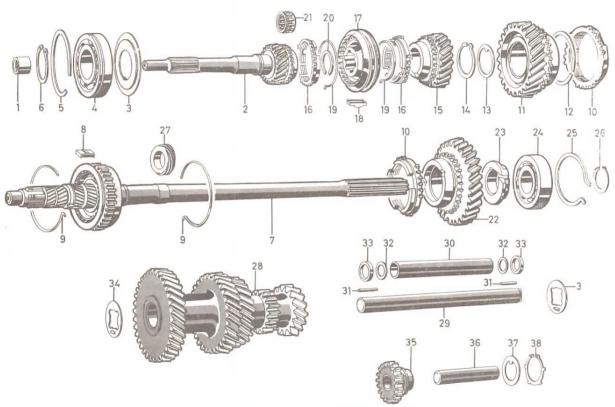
Exploded view of the four-speed gearbox gear train.
